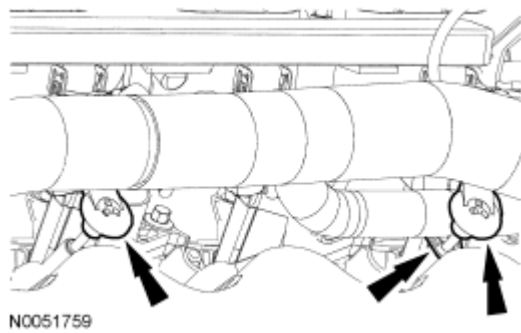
Disconnecting Engine Wiring Harness Retainers From RH Valve Cover Studs
